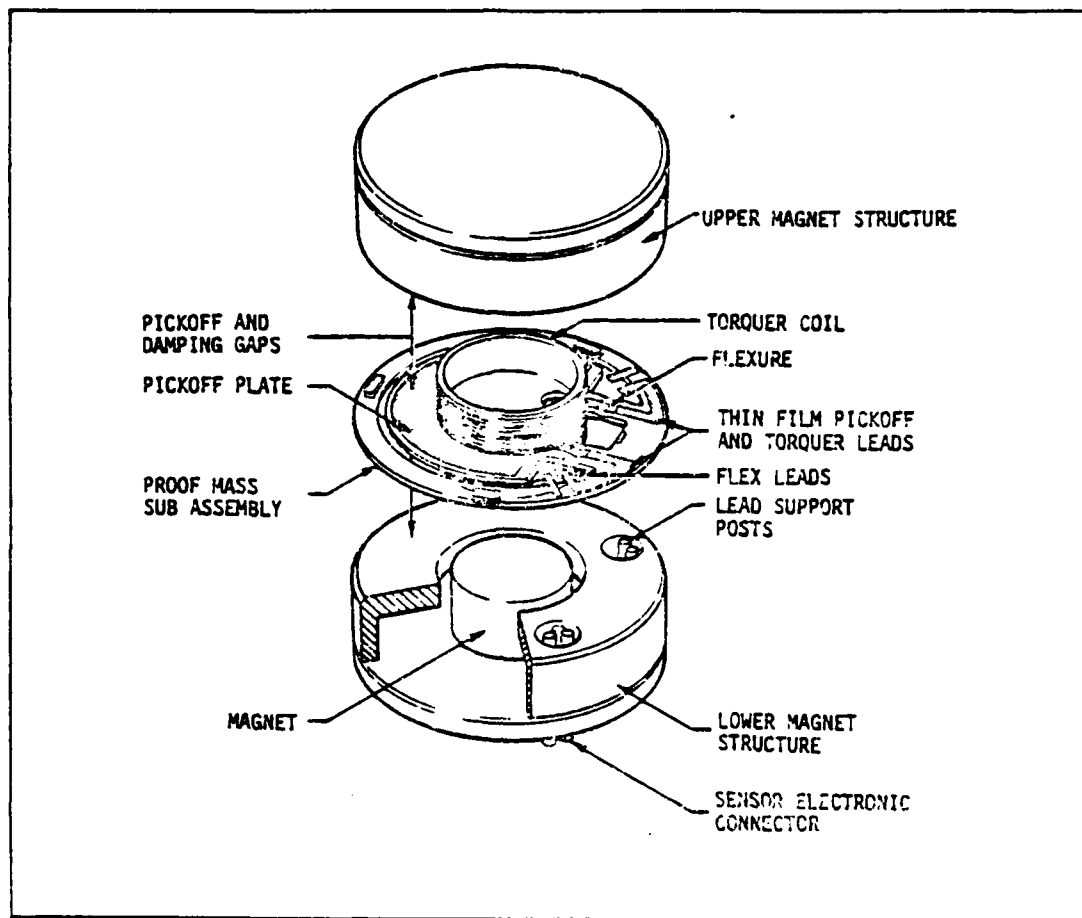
QA-1100 Sensor Assembly, Exploded View
